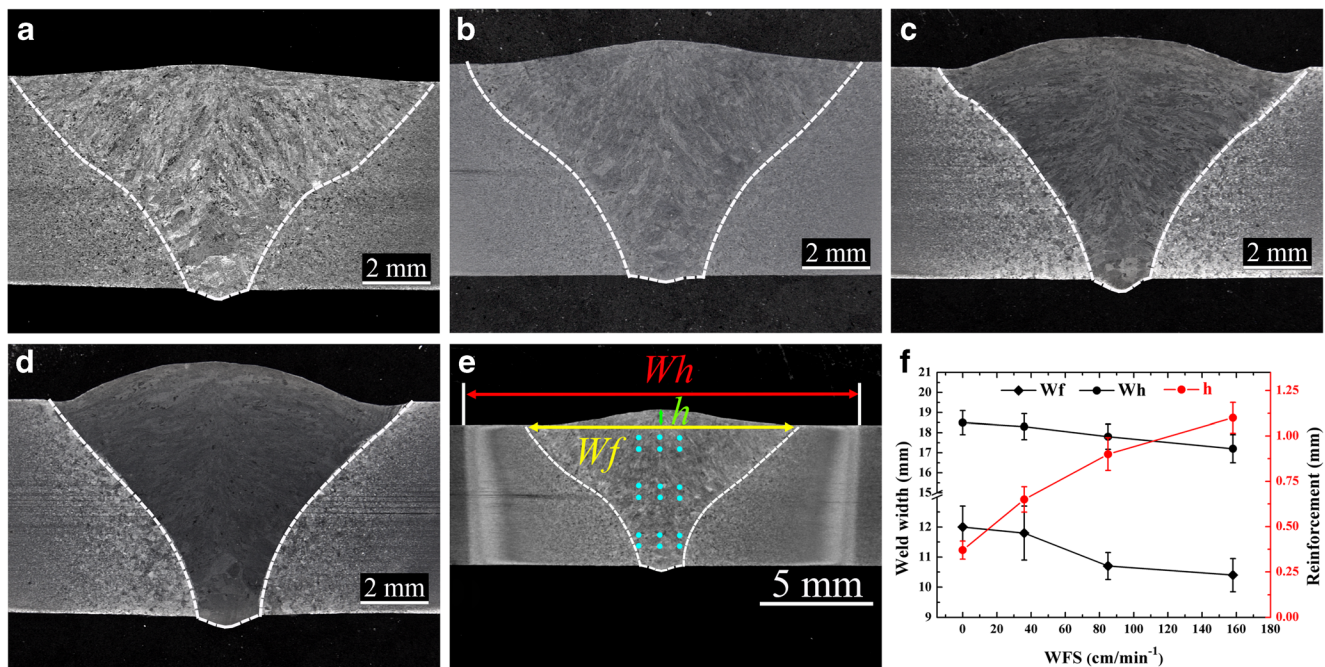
Macrograph of K-TIG welded joint with and without filler wire a weld without filler; b WFS = 36 cm/min; c WFS = 85 cm/min; d WFS = 158 cm/min; e schematic of fusion zone geometry and EDS test position; and f weld geometry variation trend
